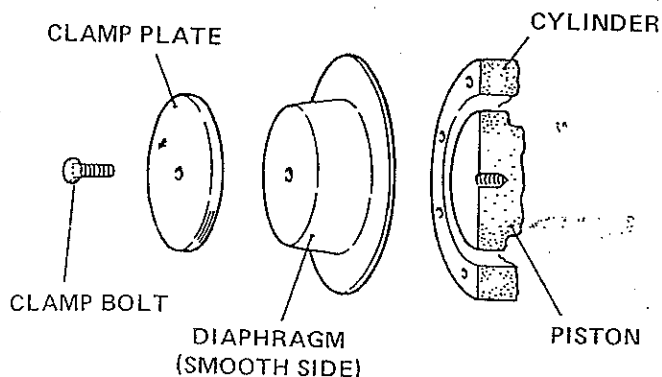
Assembly of Load Cell or Pressometer Diaphragm
